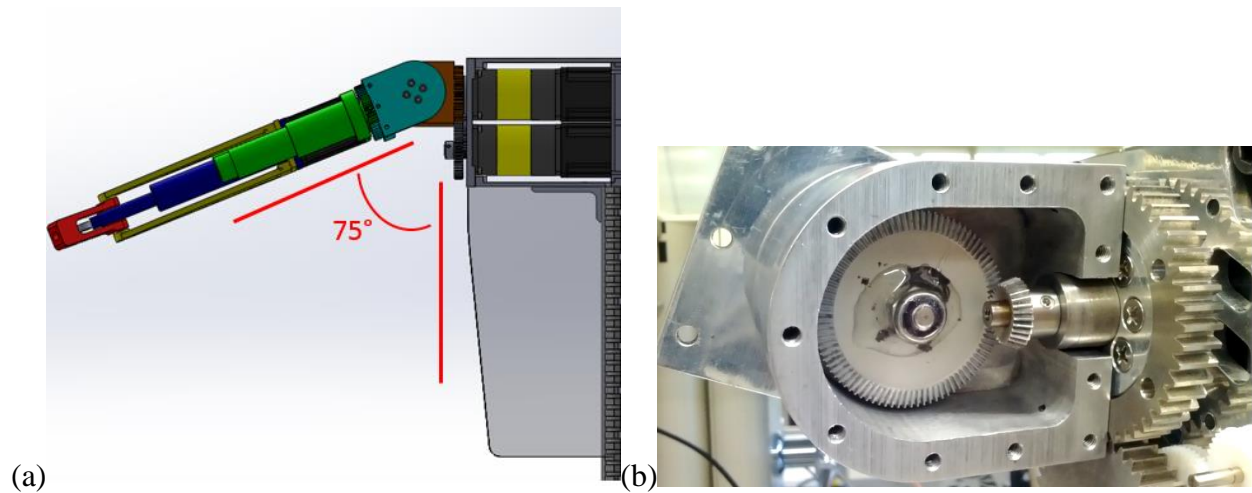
(a) Max angle before single bolt loosened from internal gear and lost contact with the pinion gear. (b) Attempted to mitigate the issue with Epoxy and locking heck nuts
